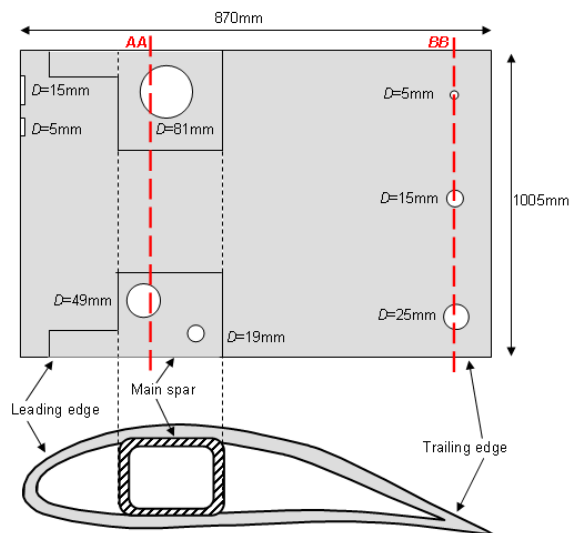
A drawing giving dimensions and identifying defects in the sample.
